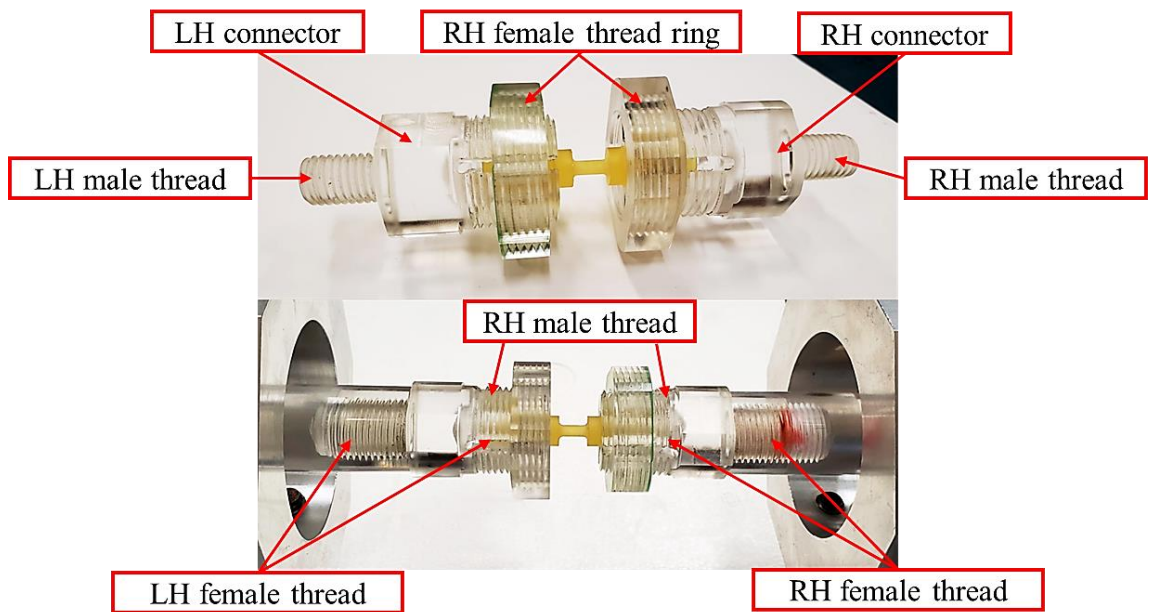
Custom clamping fixture for the SHTB specimens.
